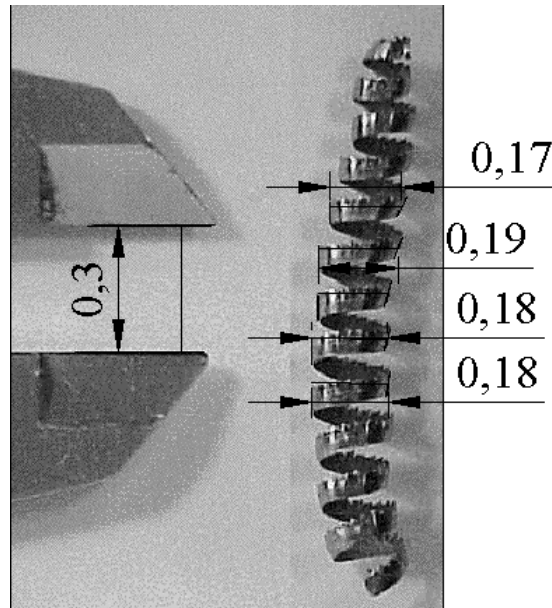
Chip Dimensions Produced by 0.03 in. Depth of Cut and 0.011 in/rev Feed Rate
